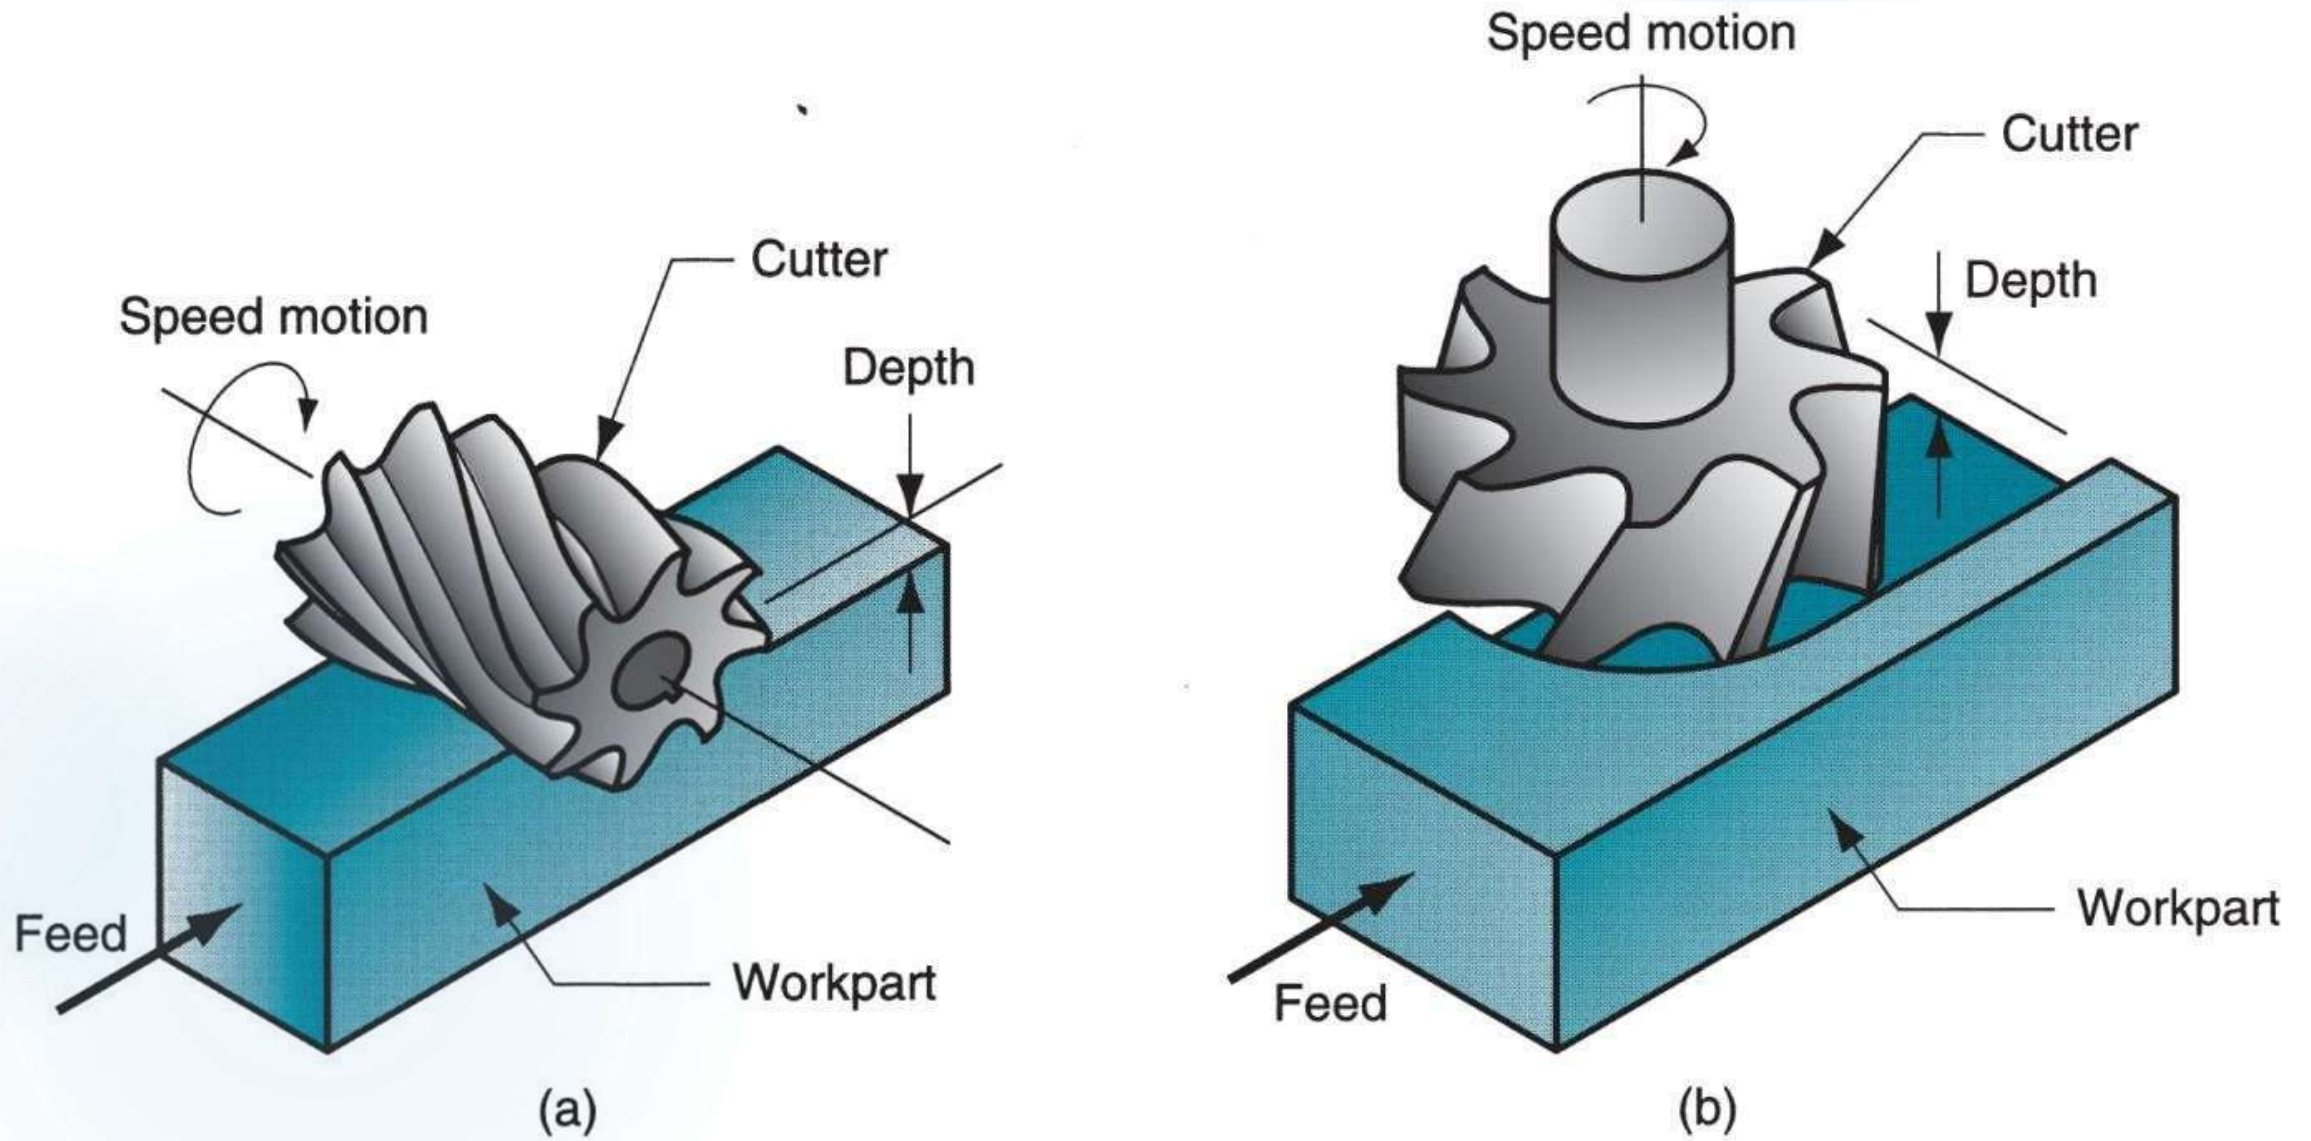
Two basic types of milling operations: (a) peripheral or plain milling and (b) face milling
